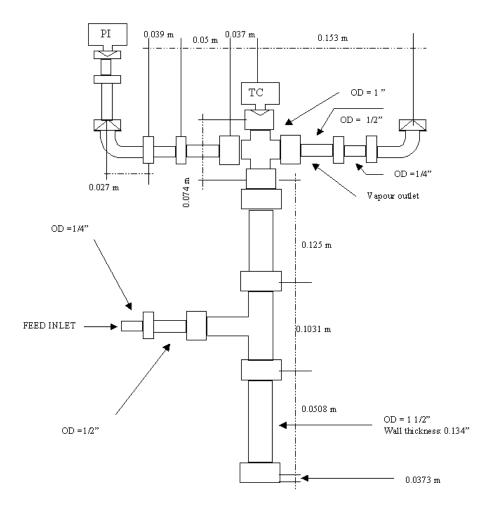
Drawing of the coker lateral inlet version showing approximate dimensions.
